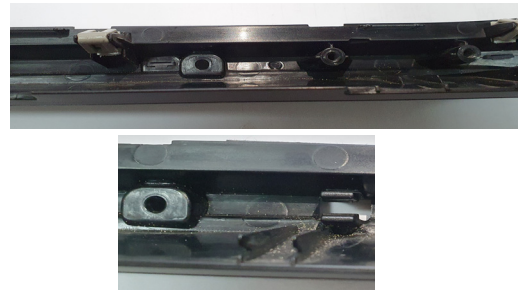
Inspection of deep groove inner hole and assembly part appearance
